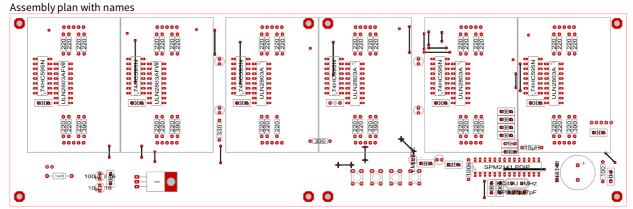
Basic assembly of SPK2141.01 1 Assembly plan with values
